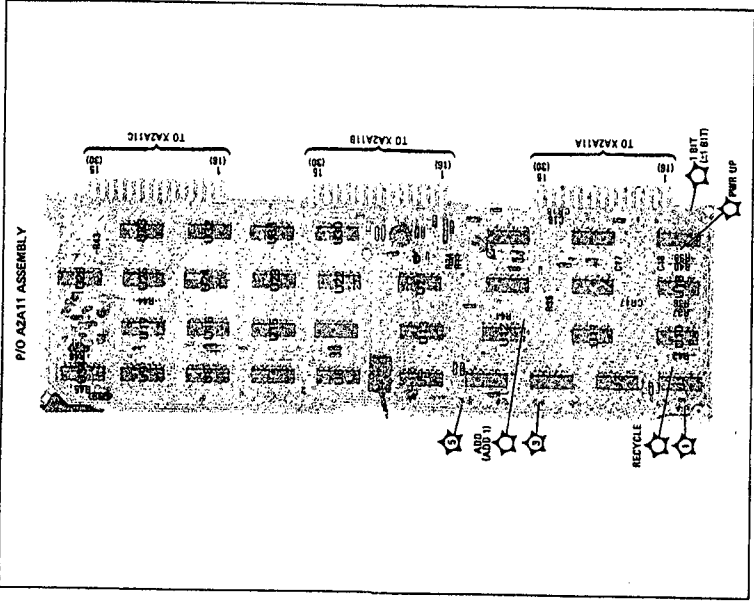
P/O AZA11 Timing and Control Assembly Component and Test Point Locations
